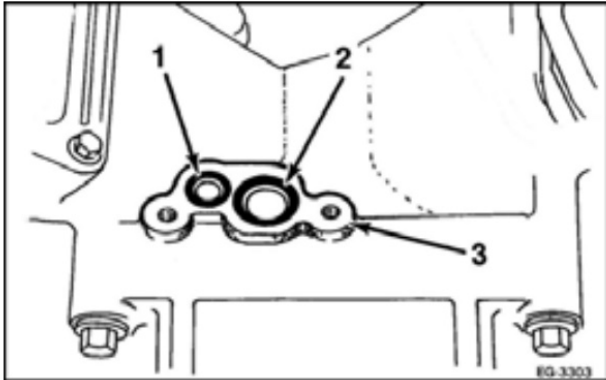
Turbocharger Oil Supply O-Ring and Oil Drain O-Ring
